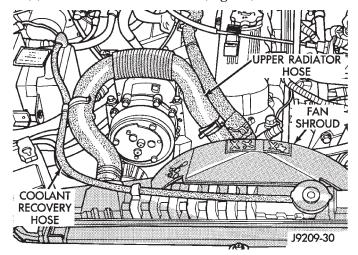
Upper Radiator Hose, Coolant Recovery Hose & Fan Shroud
